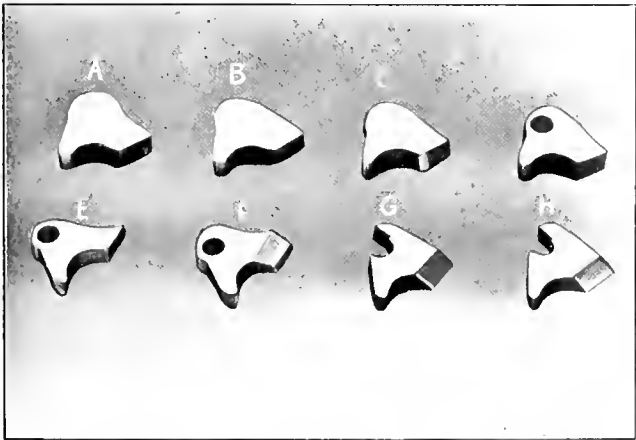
Eight Steps in the Manufacture of the Fixed Blades
